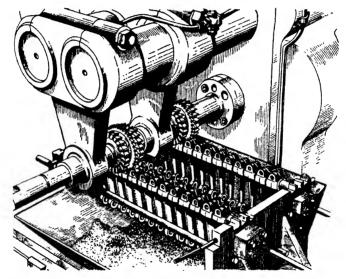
Mass-production setup for milling connecting-rod ends.
